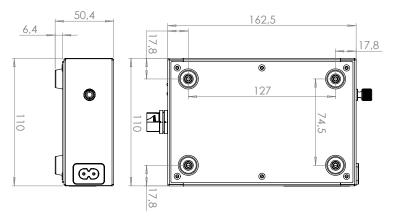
Dimensions of control box. Tolerance is 0.3 mm
